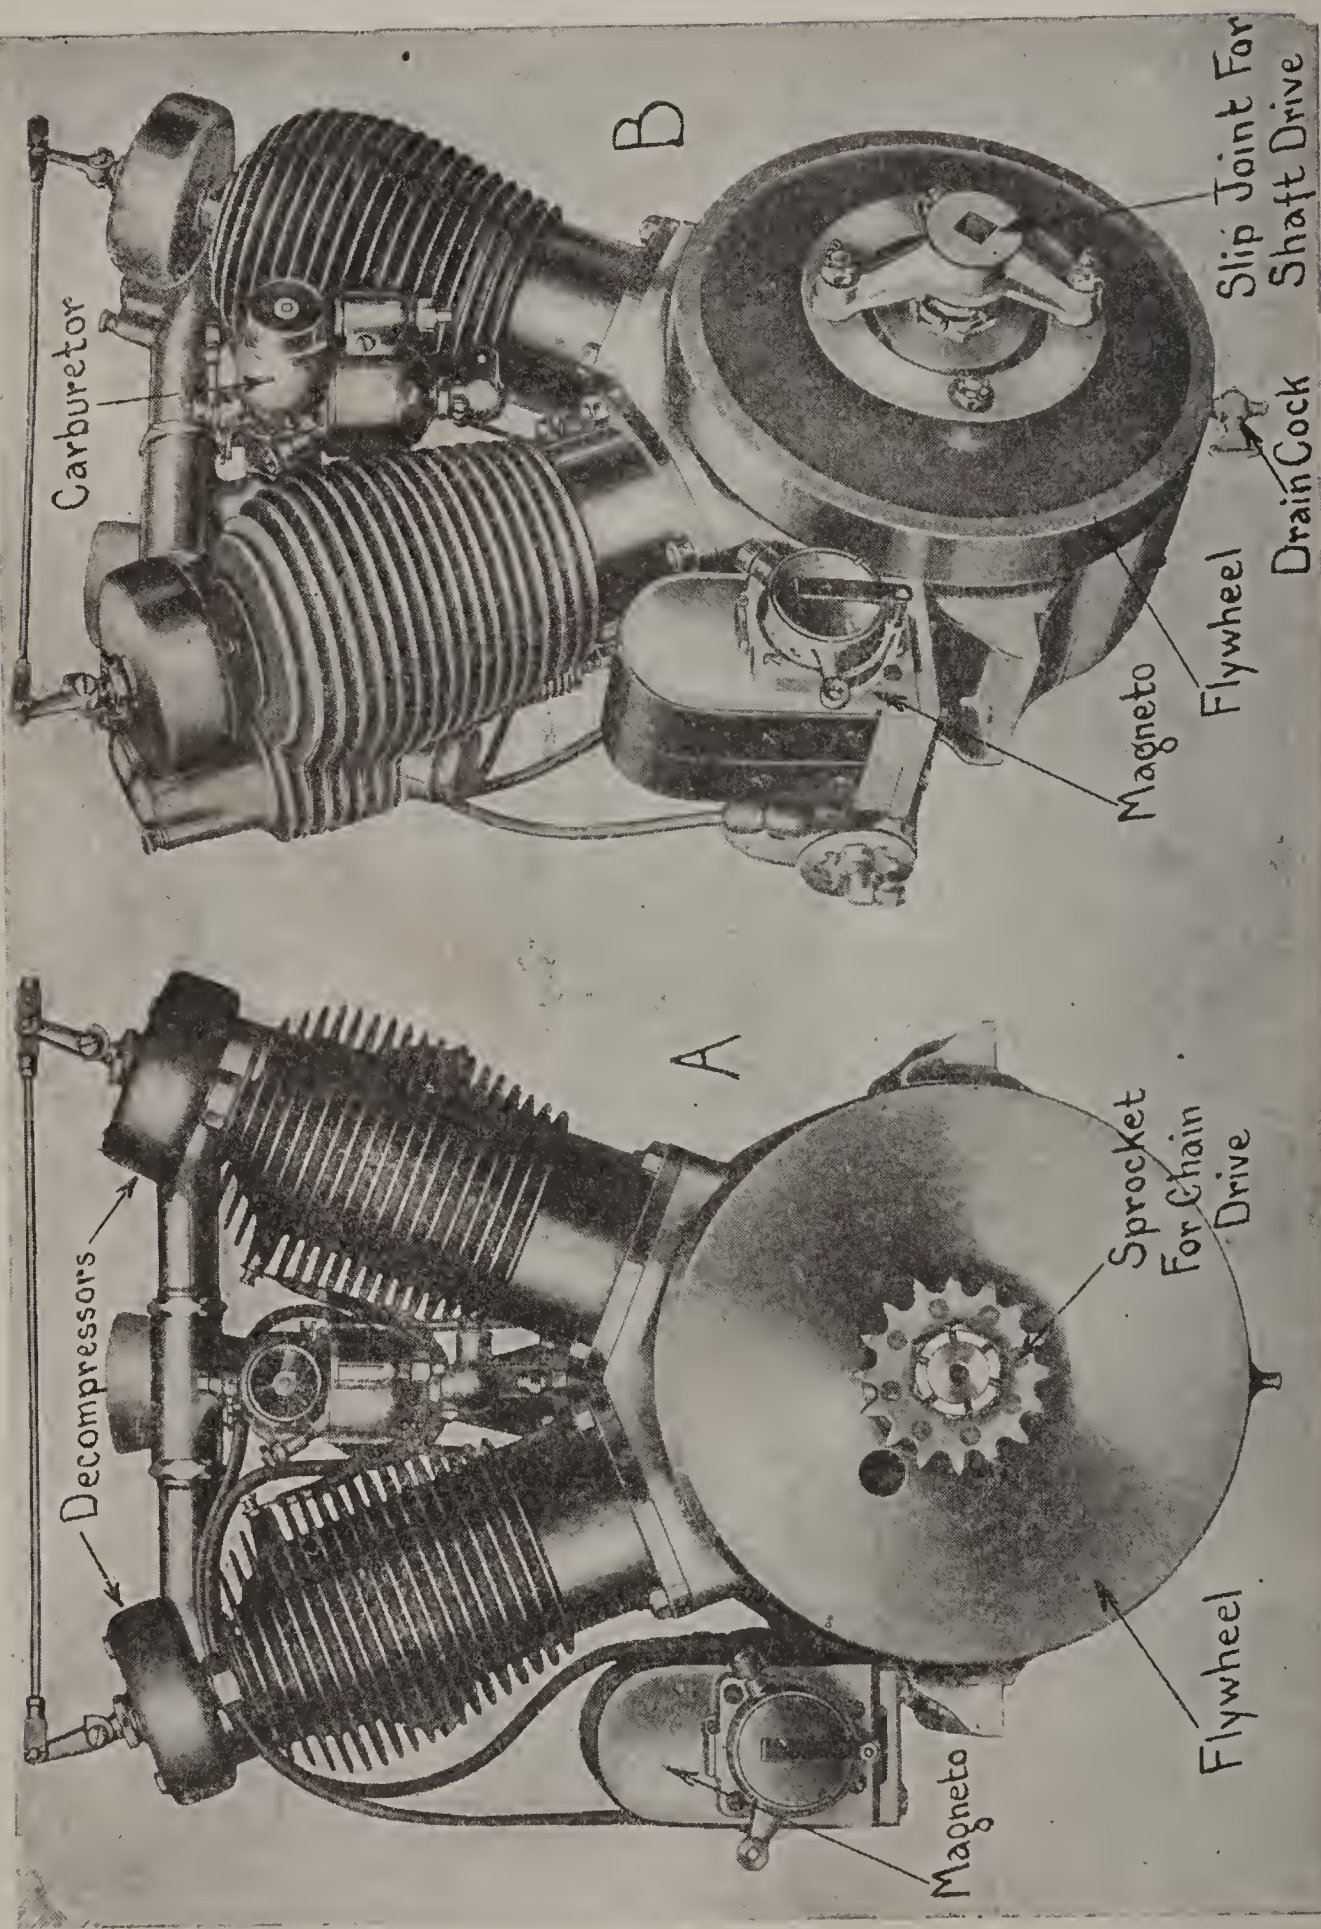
Drive Side of the Spacke De Luxe Cyclecar Motor. A—With Sprocket for Chain Drive. B—With Slip Joint for Shaft Drive.
